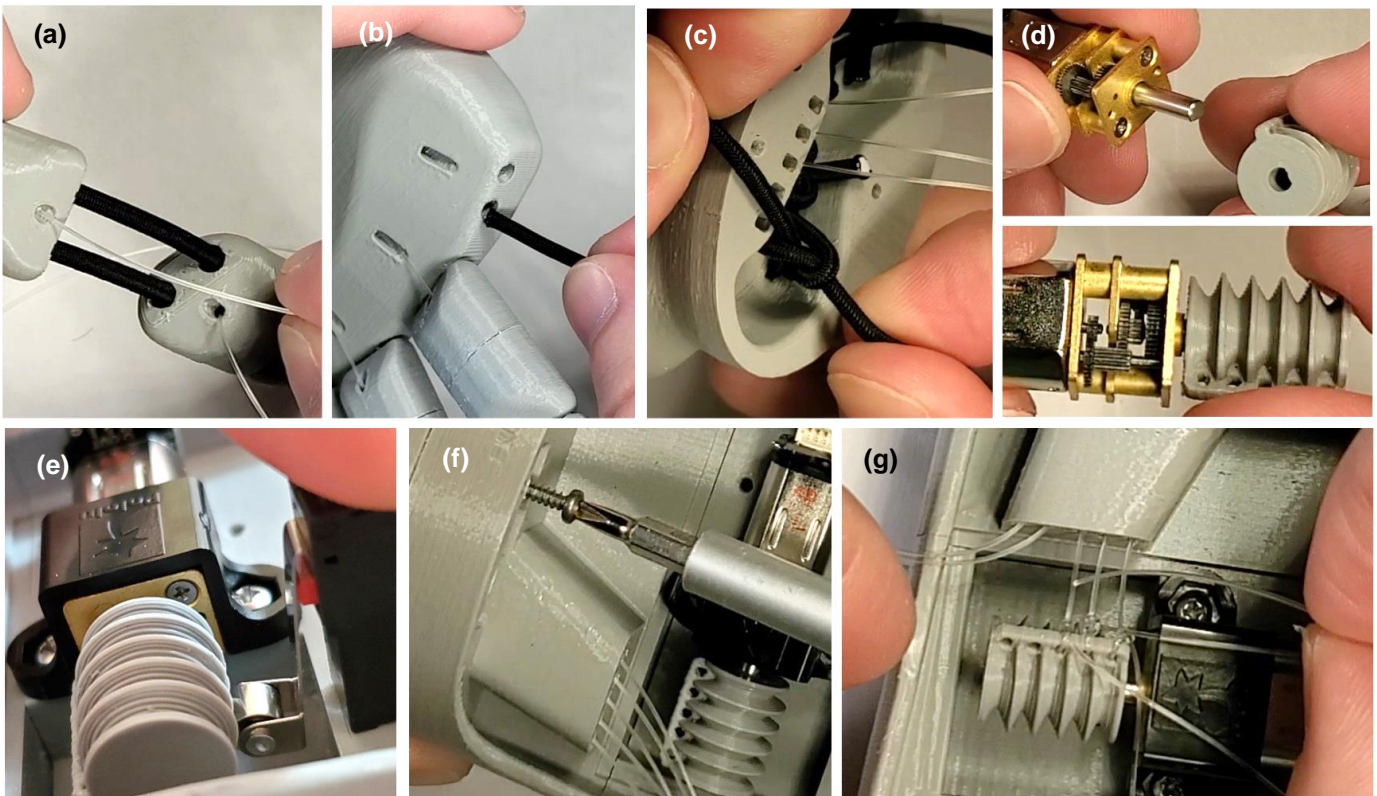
Assembly process. (a) Threading cables through the fingers, (b) Threading cables through the palm, (c) Tying elastic at the base of the palm, (d) Mounting the spool on the motor, (e) Placing the roller switch next to the spool, (f) Screwing the motor, palm, and wrist together into one assembly, (g) Tying the monofilament cables to the spool.
